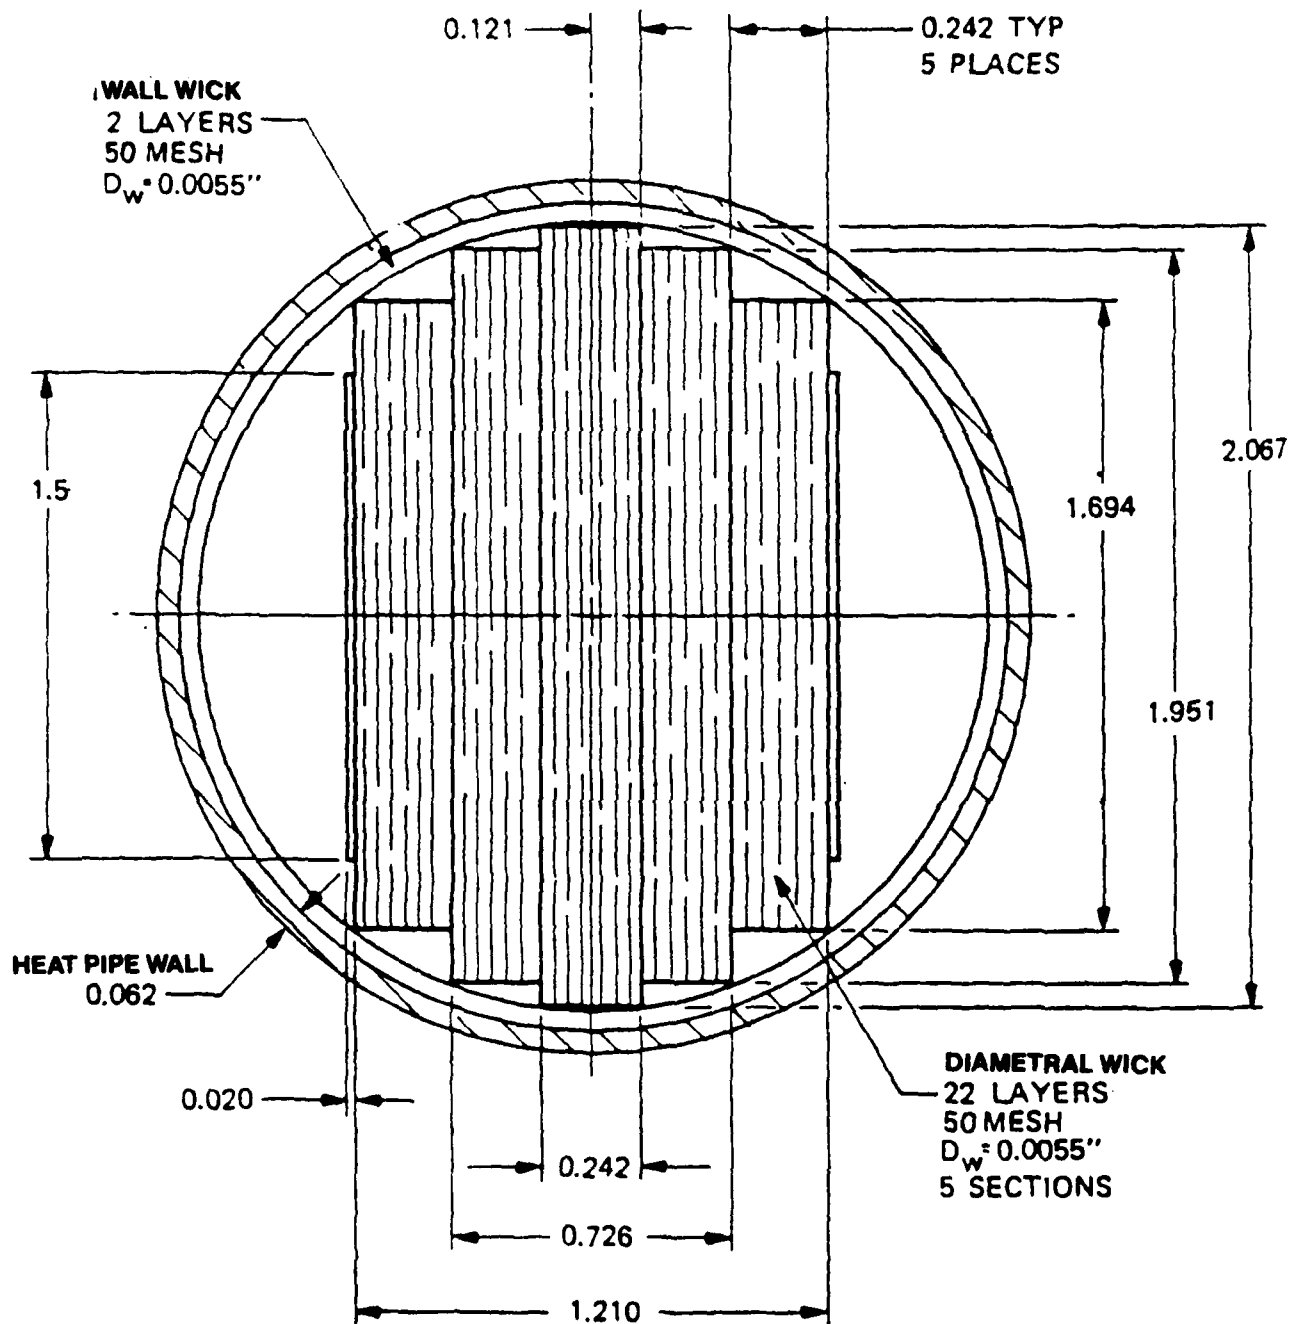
HEAT PIPE WICK CROSS SECTION
